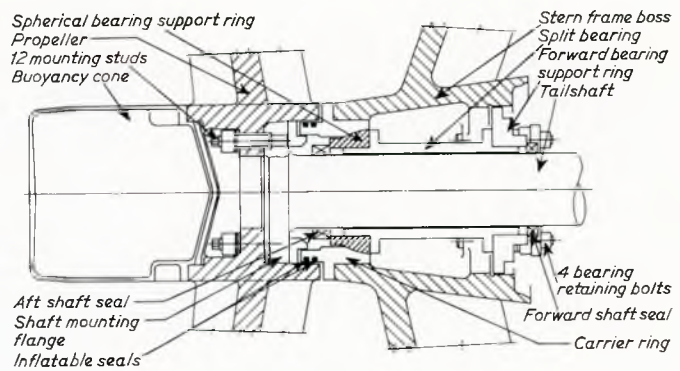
Solid propeller with hollow cylindrical boss and internal flanged mounting
